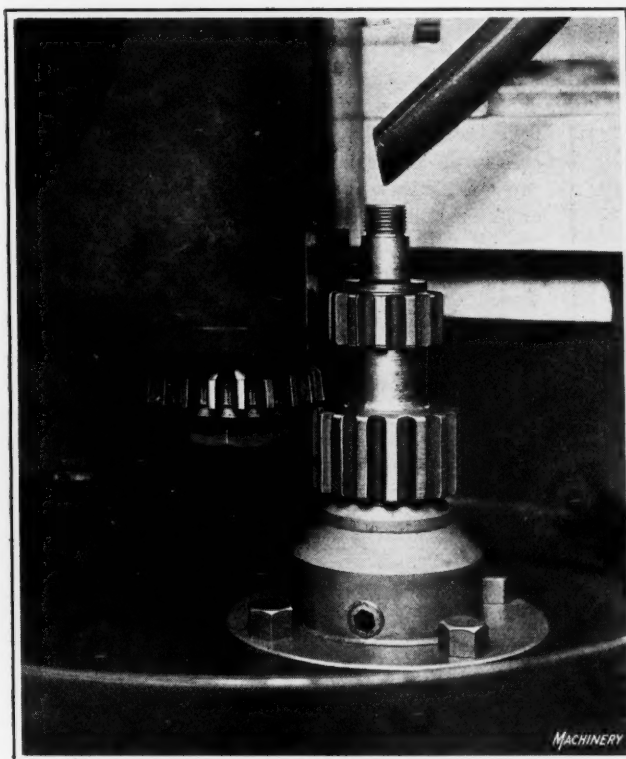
Gear Shaper which is arranged for cutting on the Push or Downward Stroke of the Cutter
